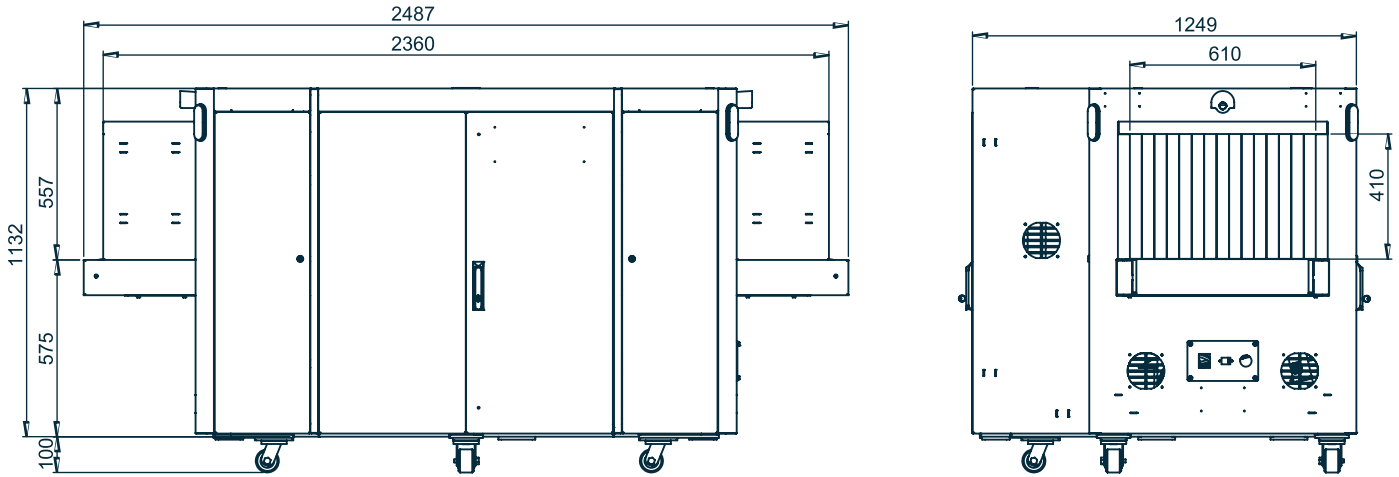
Dimensional Overview of KritiScan® 6040DV in Millimeter (mm)
